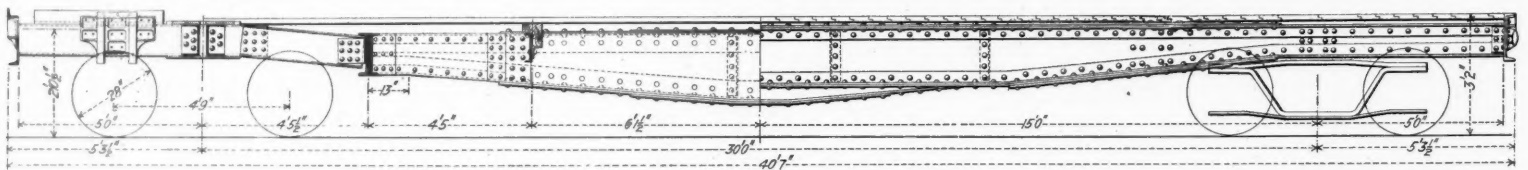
Plan and Elevation of 120,000 lb. Flat Car for The General Electric Co.
